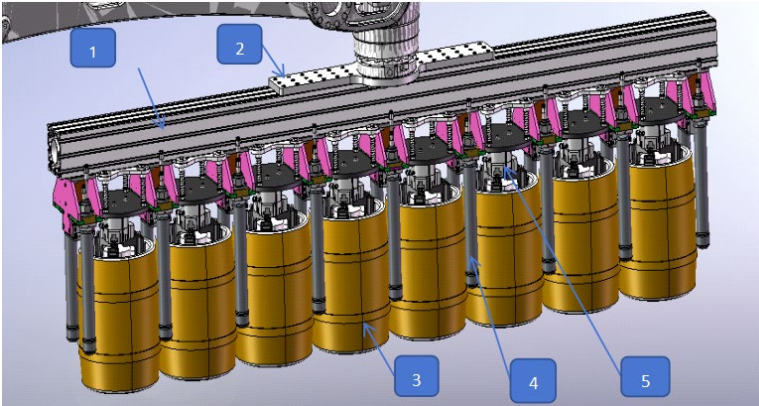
Clamping device(1.Aluminum profile main beam 2.Robot coupling plate 3.Wine barrels 4.Guide rods 5.Pneumatic gripper)
